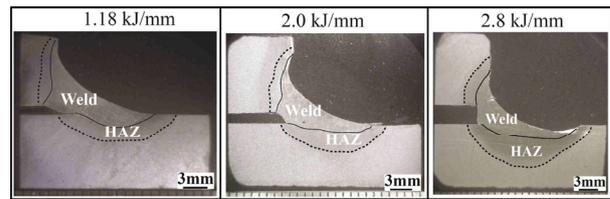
The weld cross sections due to heat input (the main pipe of 8 mm thick, flow rate of 42 mmcsfd)
